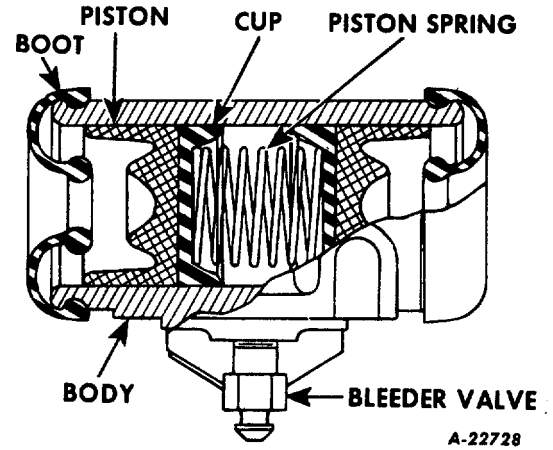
Typical Wheel Cylinder (Double-Piston Type)
